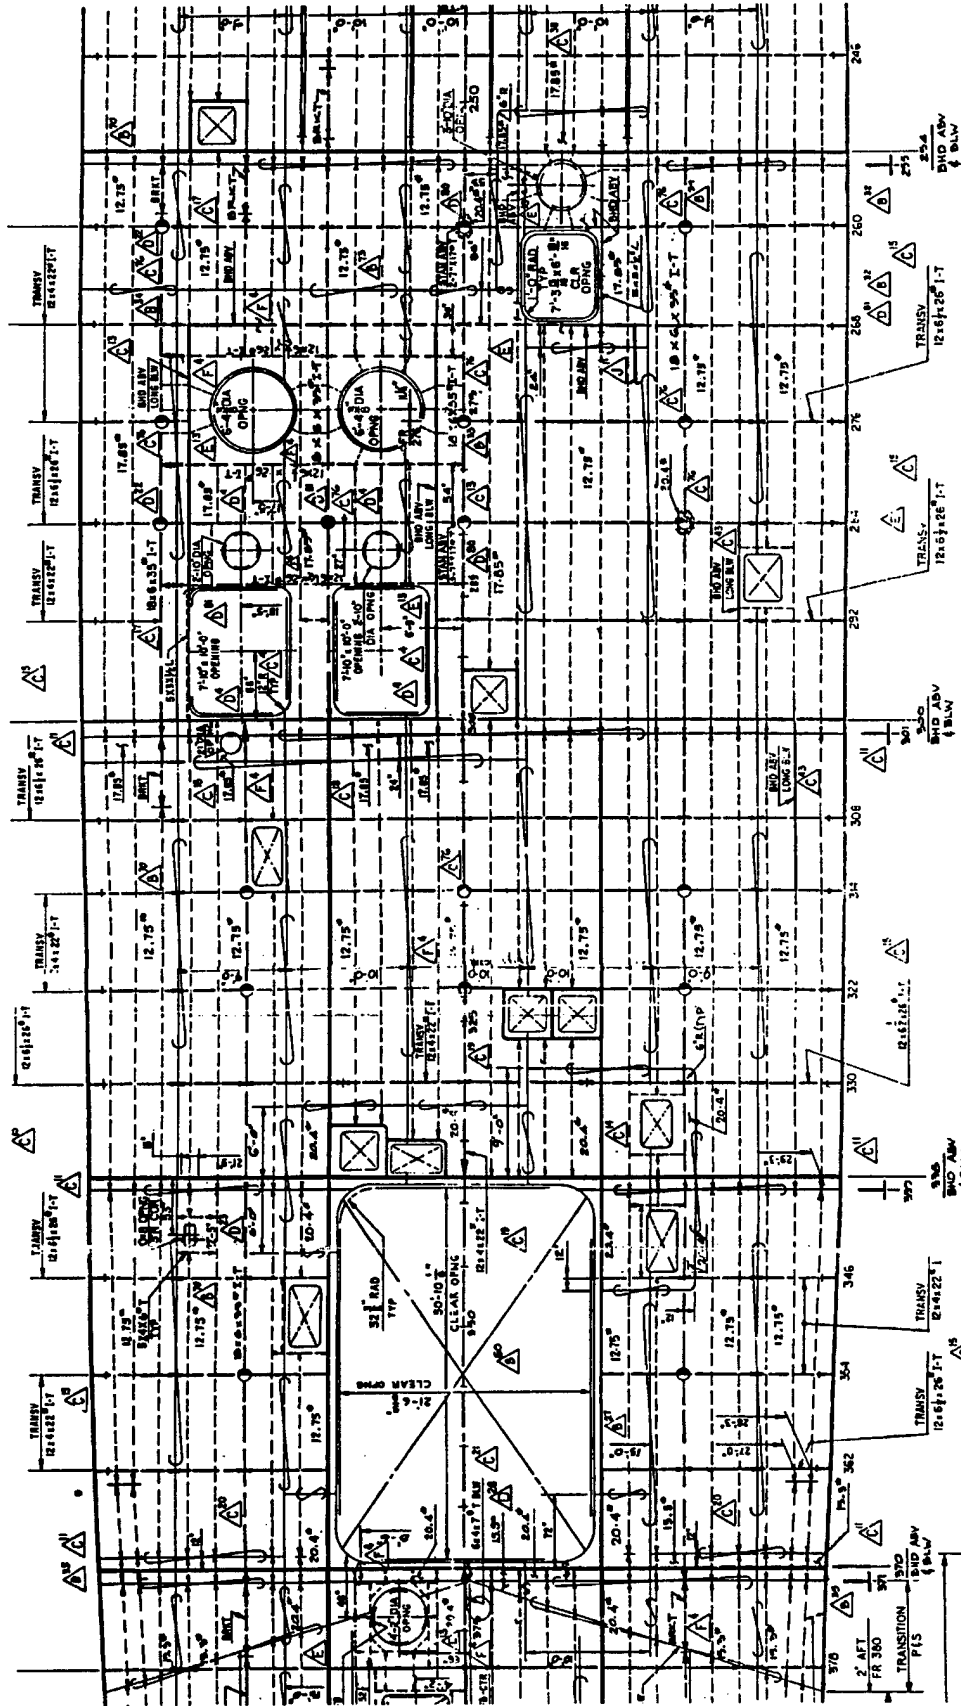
Structural Scantling Plan Frame 246, NAVSEA Drawing 100-6218844
